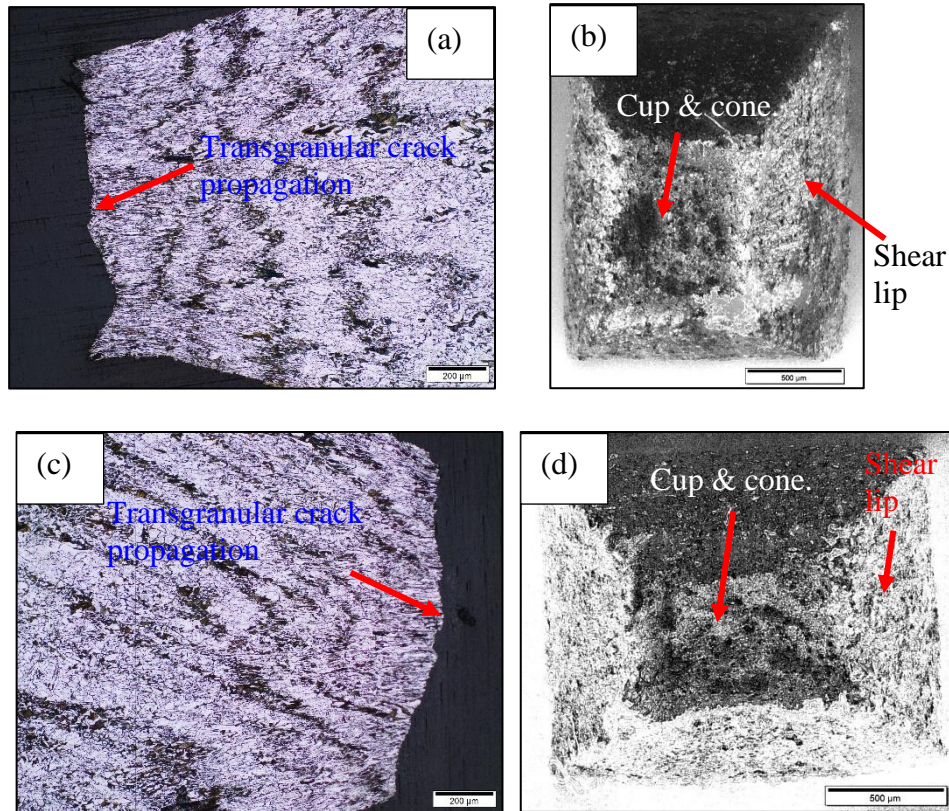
Optical image of (a) the crack path, and (b) the fracture surface of tensile specimen RFW-3 and optical image of (c) the crack path, and (d) the fracture surface of tensile specimen TIG-3.
